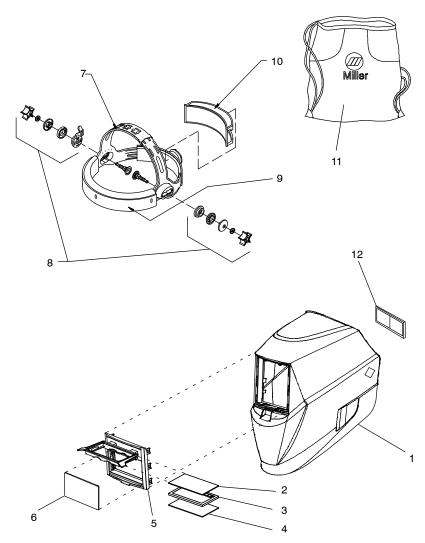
Fixed Shade No. 10 Flip-Up Welding Helmet
